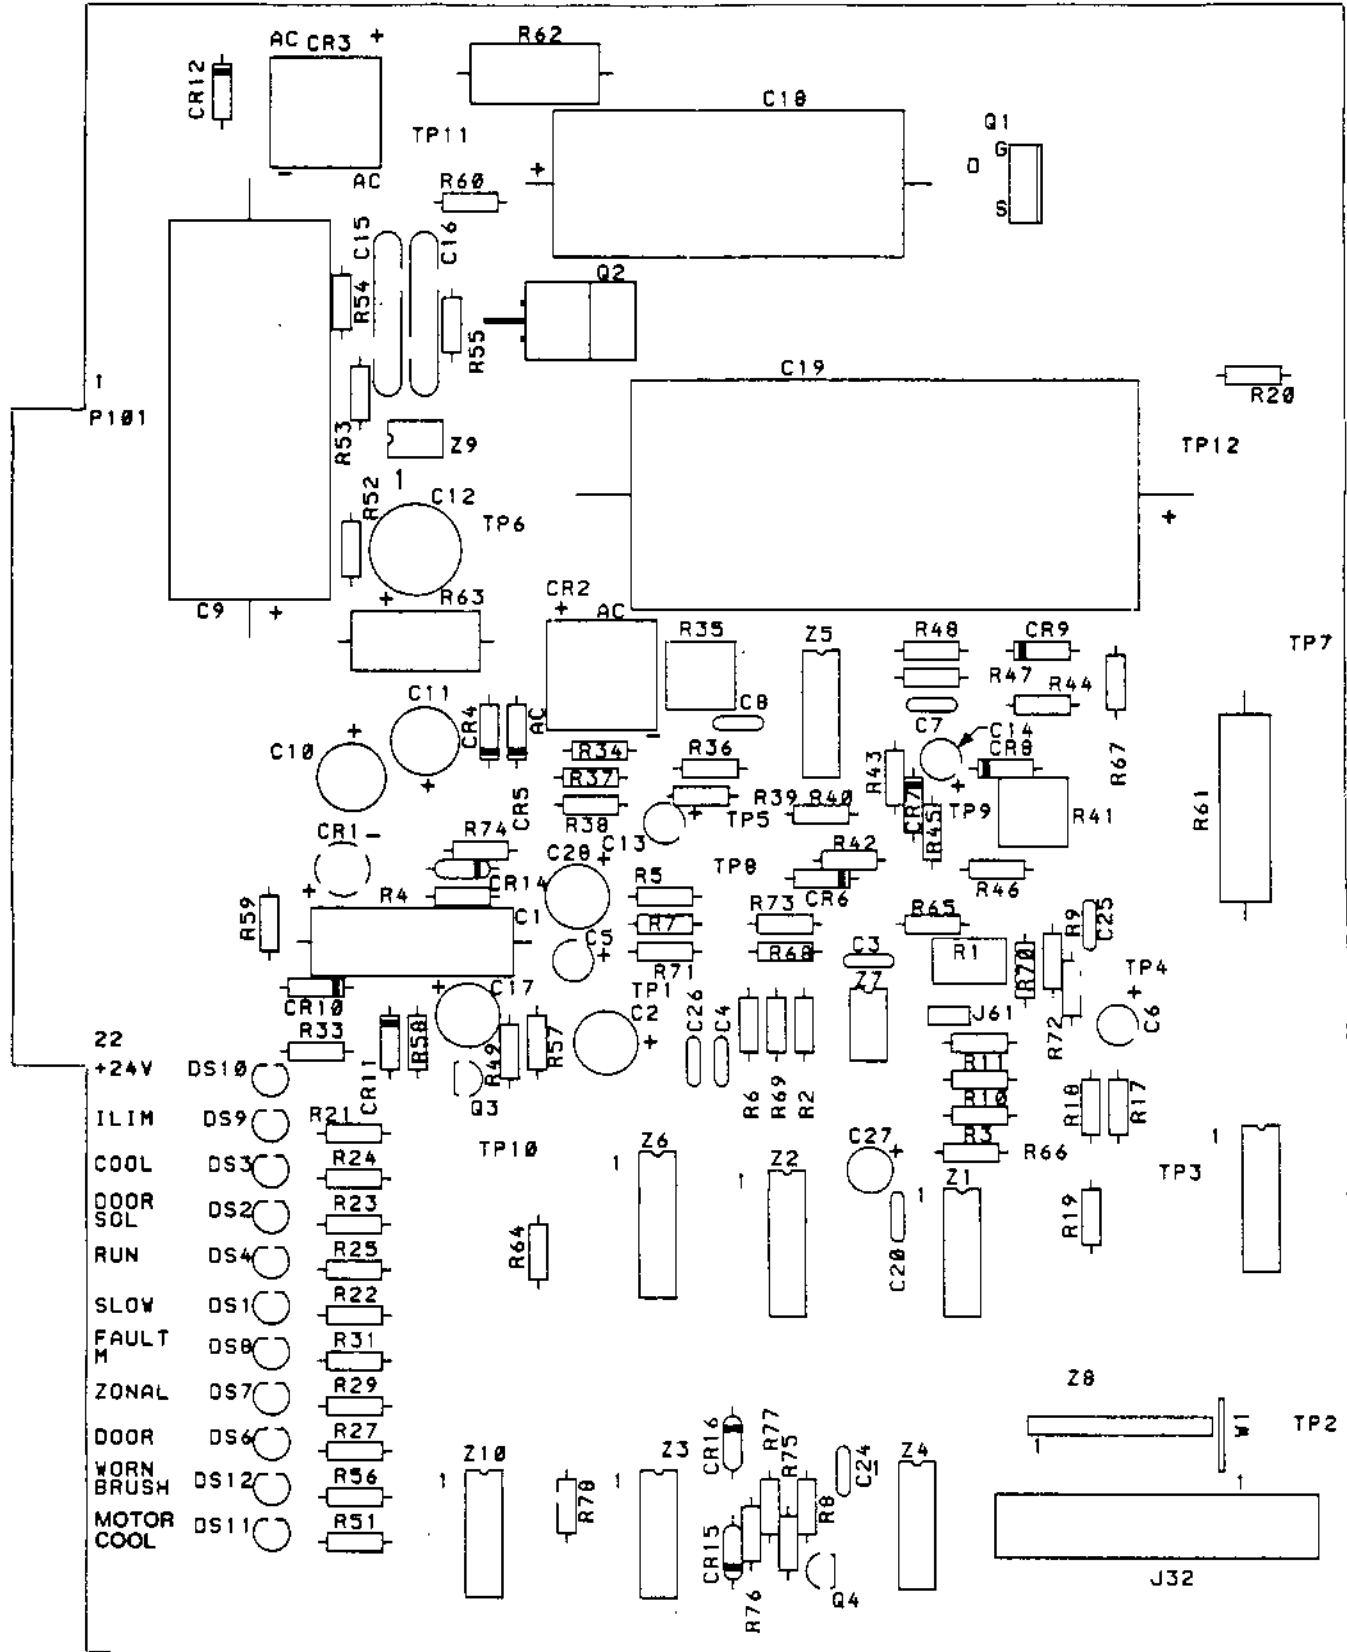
Component Location: High Voltage Interface Printed Circuit Board, PN 50710-5
